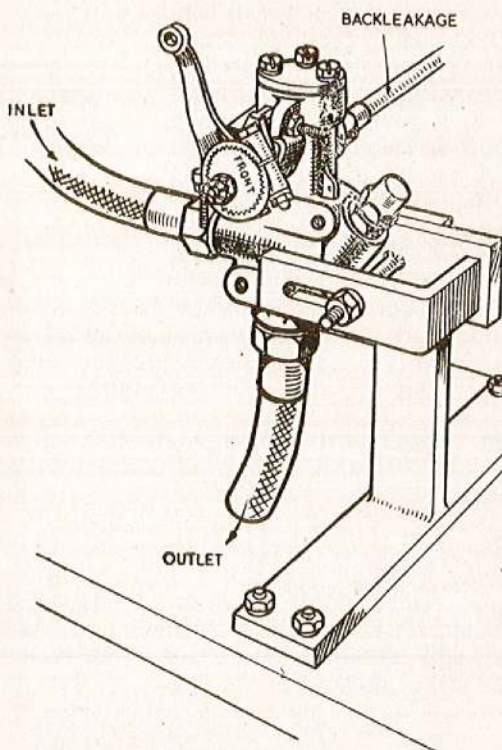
(a) View showing a T.V.A. 3 throttle valve mounted on the test rig
